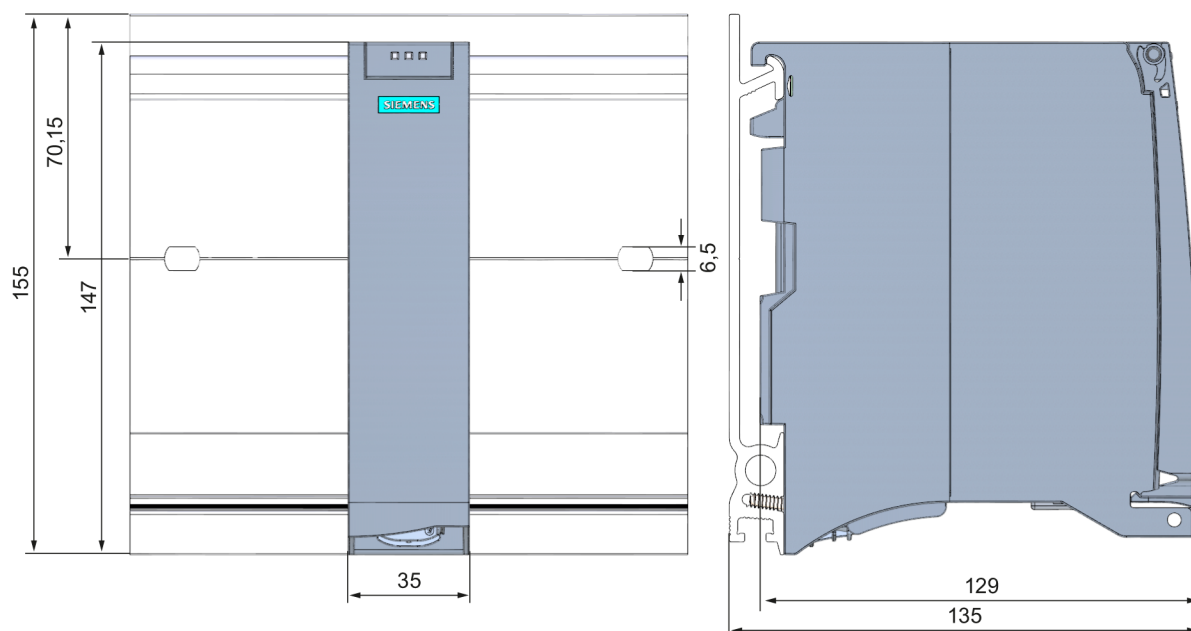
Dimensional drawing of the IM 155-5 DP ST interface module, front and side views
